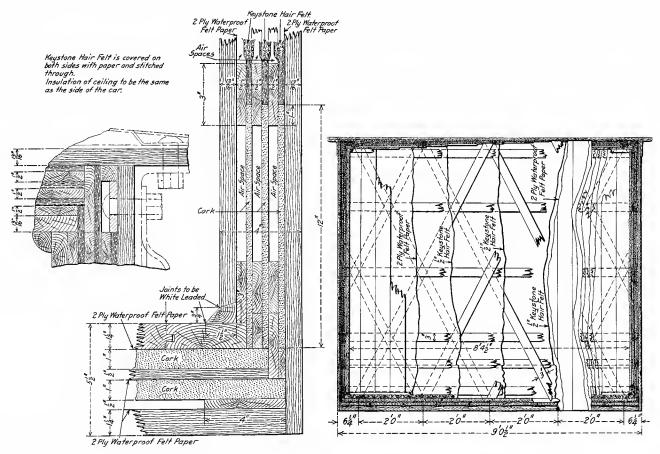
Insulation Details for Pennsylvania Railroad Steel Frame Refrigerator Cars.
